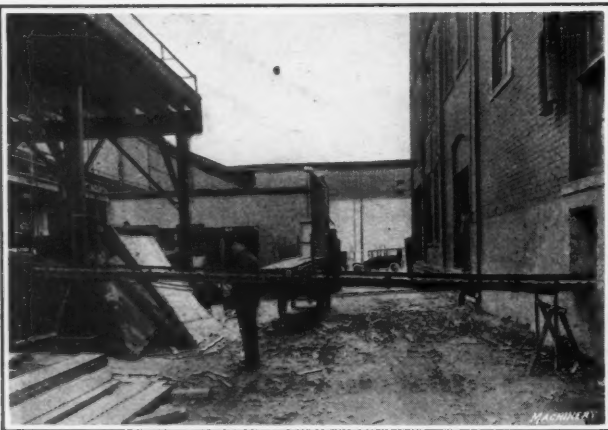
This illustration shows the gravity carrier leading from the spiral chute shown in Fig. 89 to the machining shop. The carrier is suspended on cables so that it may be raised to provide the necessary head room for a team to go underneath
